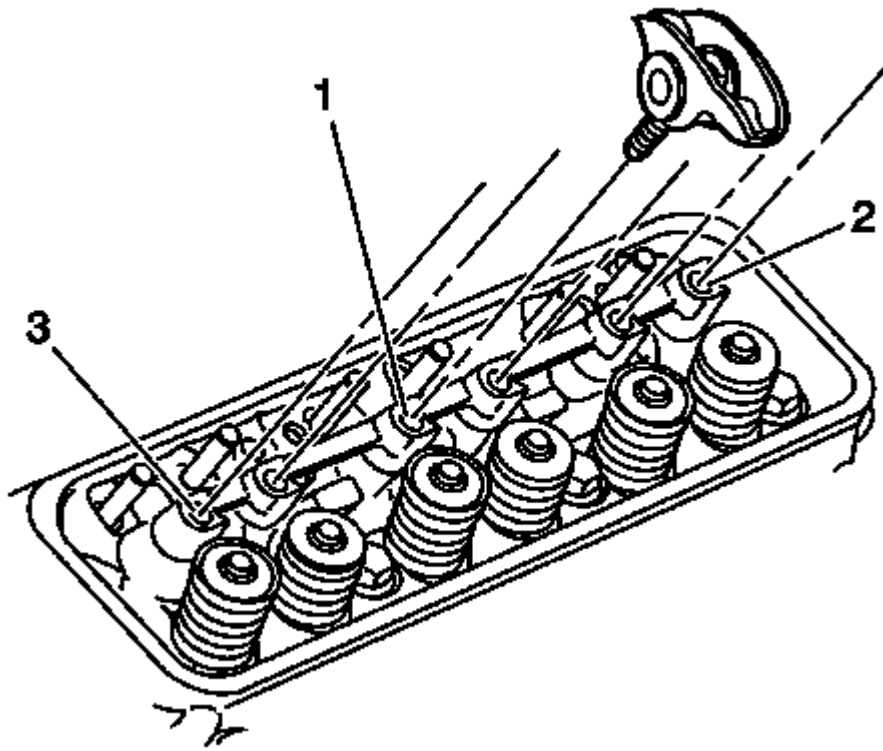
View Of Valve Rocker Arm Bolt Locations
